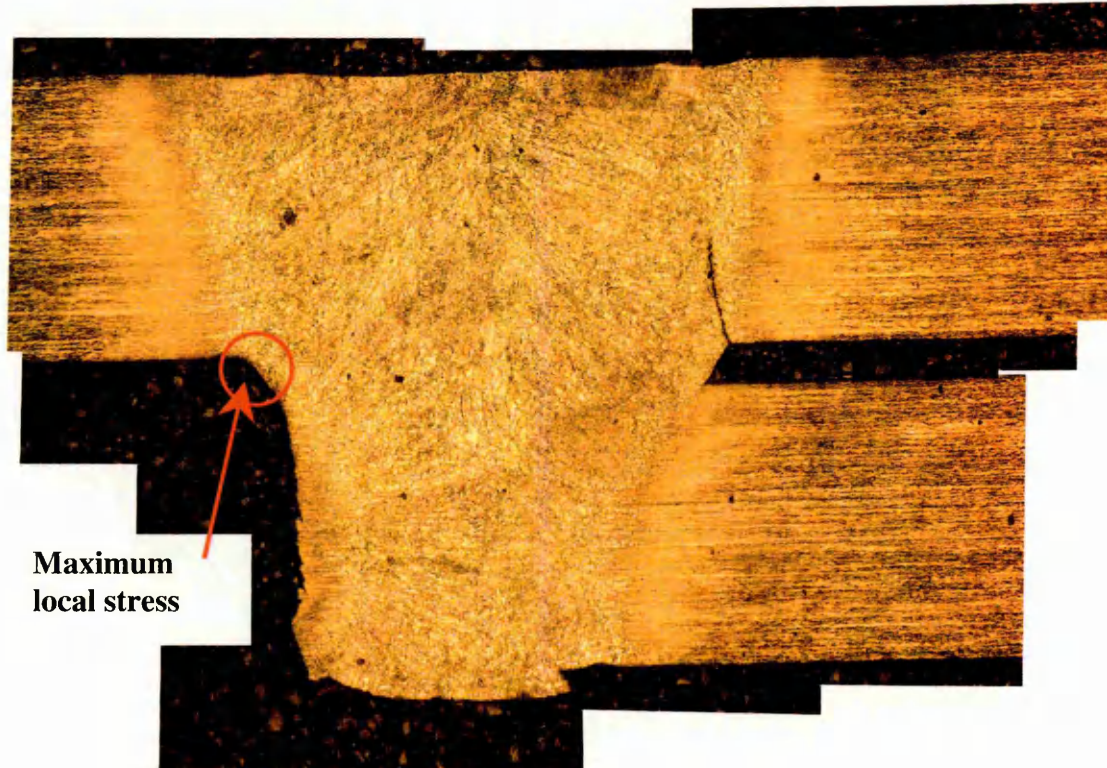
1mm 2101 lap joint fatigue failure with a fatigue crack present at the opposite side of the lap joint
